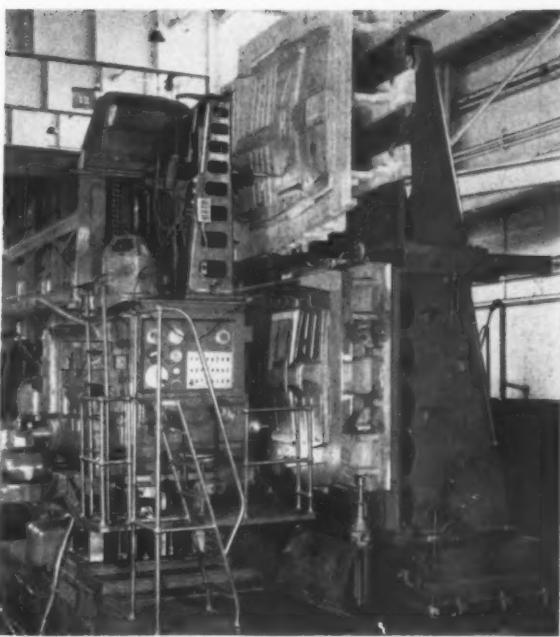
Large Keller tool room machine cutting automobile floor board die from wooden model
